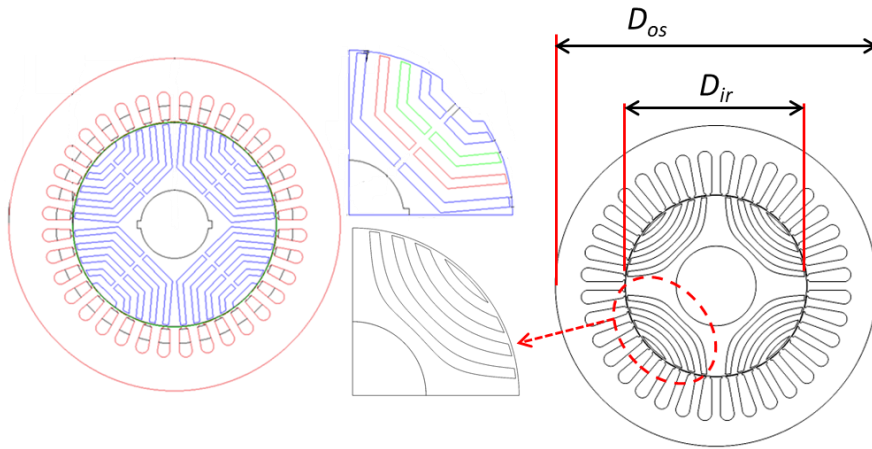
Machine geometry, 2D layout of conventional stator and rotor design from [62] and the improved rotor design.
